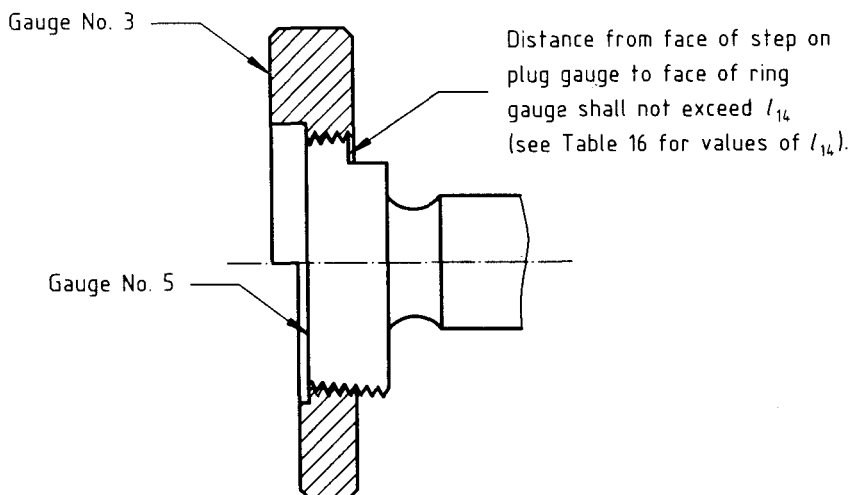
Checking pitch diameter of taper full form threaded plug gauges for wear using parallel modified thread form check ring gauge
